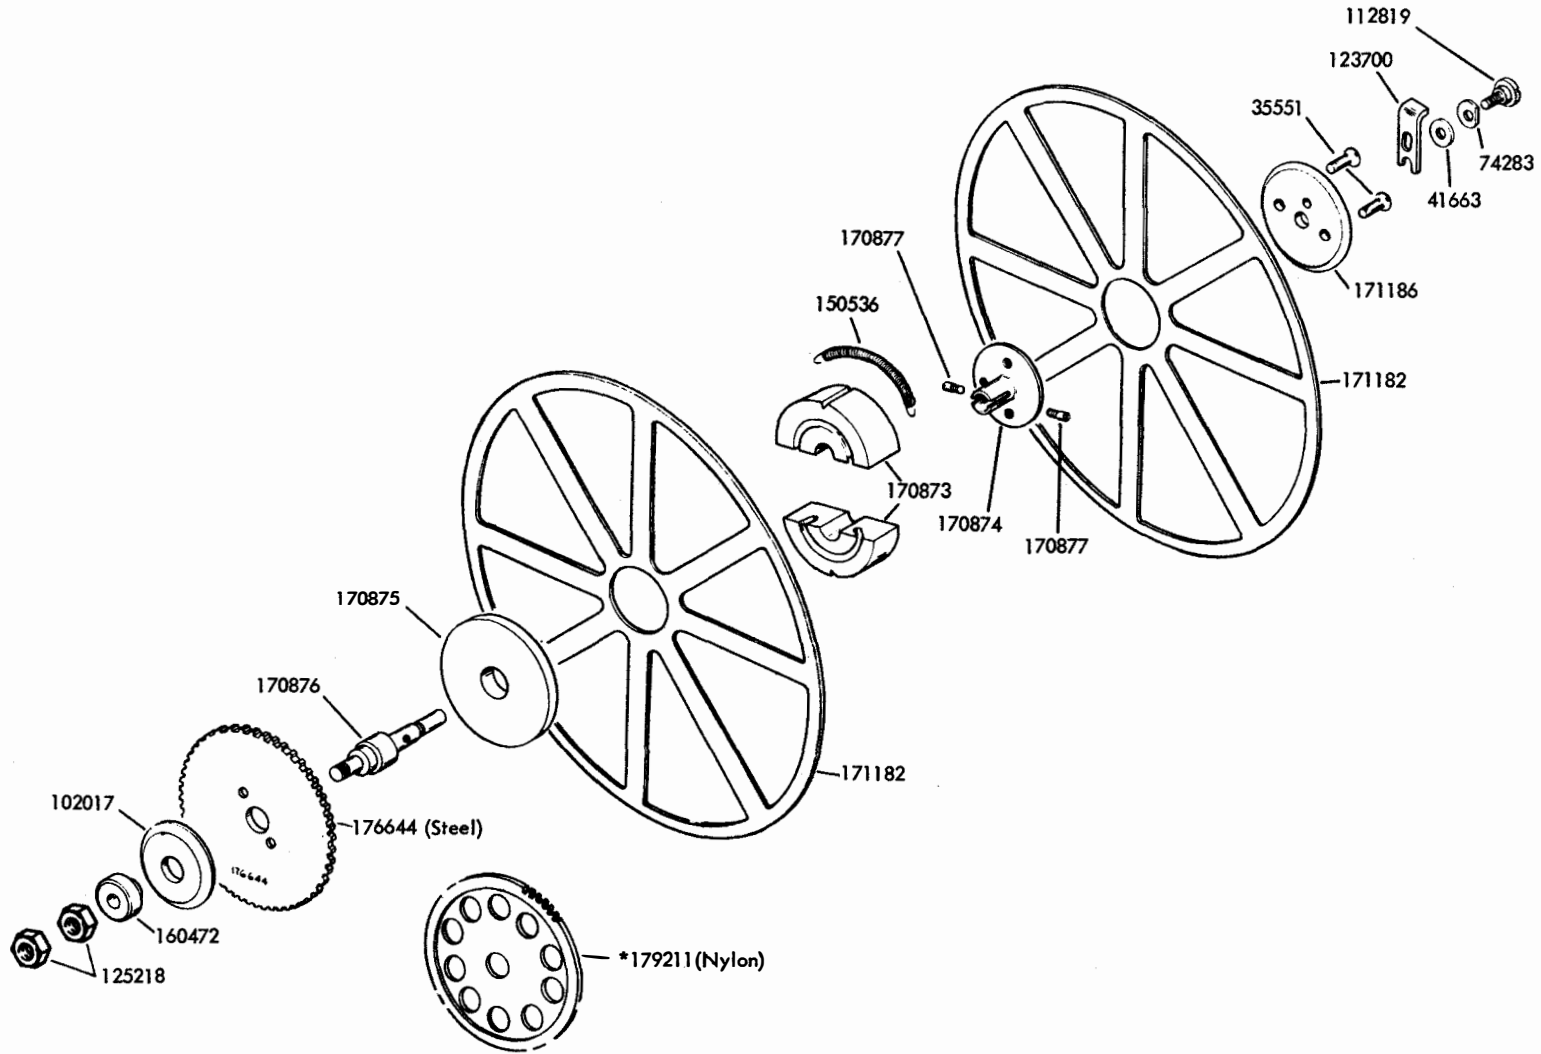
159222 TAPE WINDER REEL ASSEMBLY AND 159223 TAPE SUPPLY REEL ASSEMBLY (LOW SPEED)
